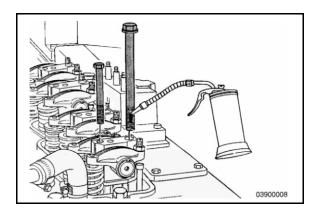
INSPECT THE PEDESTAL CAPSCREWS
